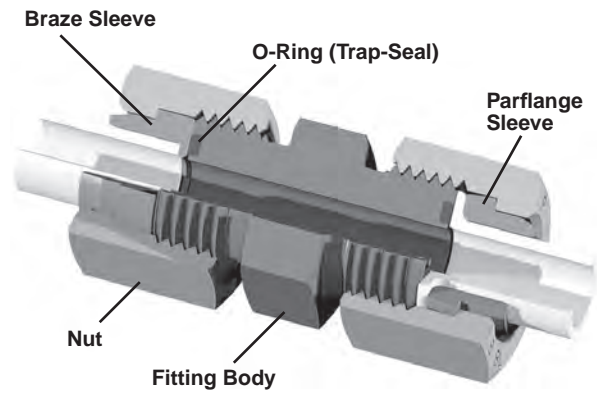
Seal-Lok Union cutaway with flanged and brazed assemblies
